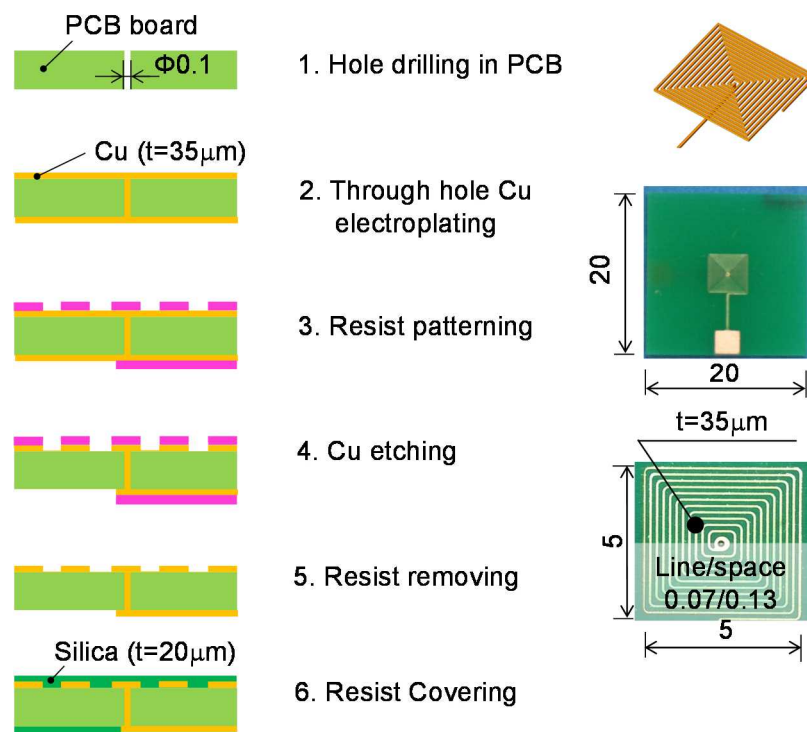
Spiral micro-coil fabricated by PCB process
